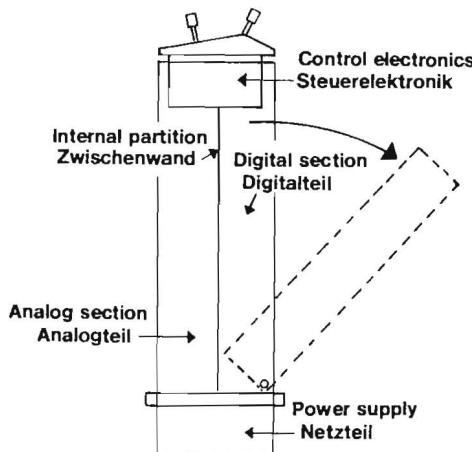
Sketch of EMT 250 assembly; both side panels tilt out.
